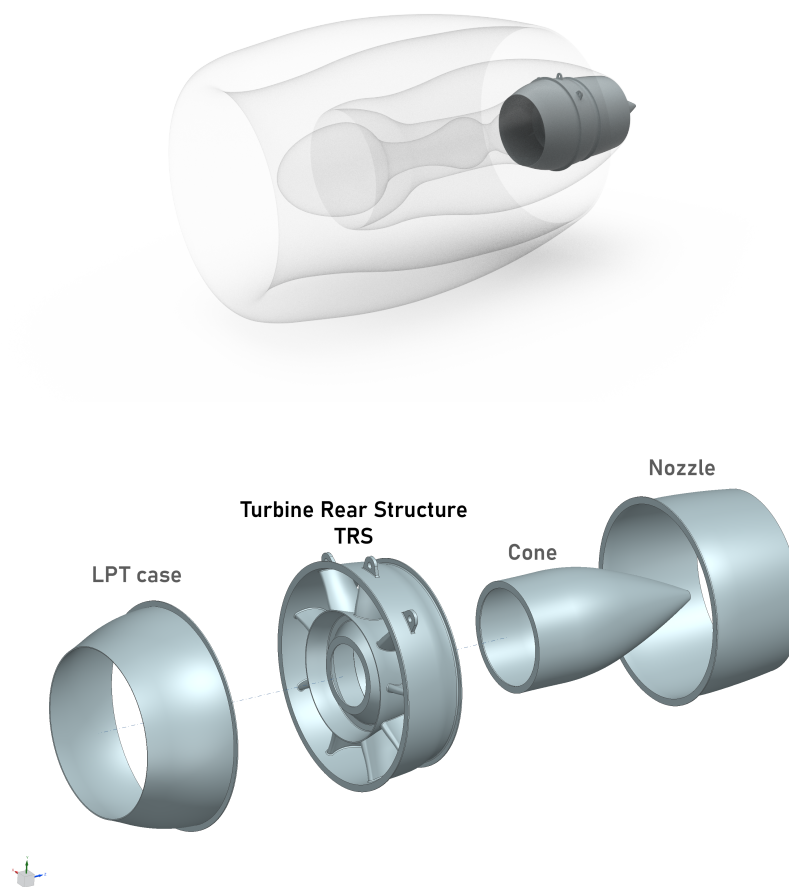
(top) TRS and neighbouring components positioning on the jet engine and (bottom) neighbouring components in CAD exploded view
